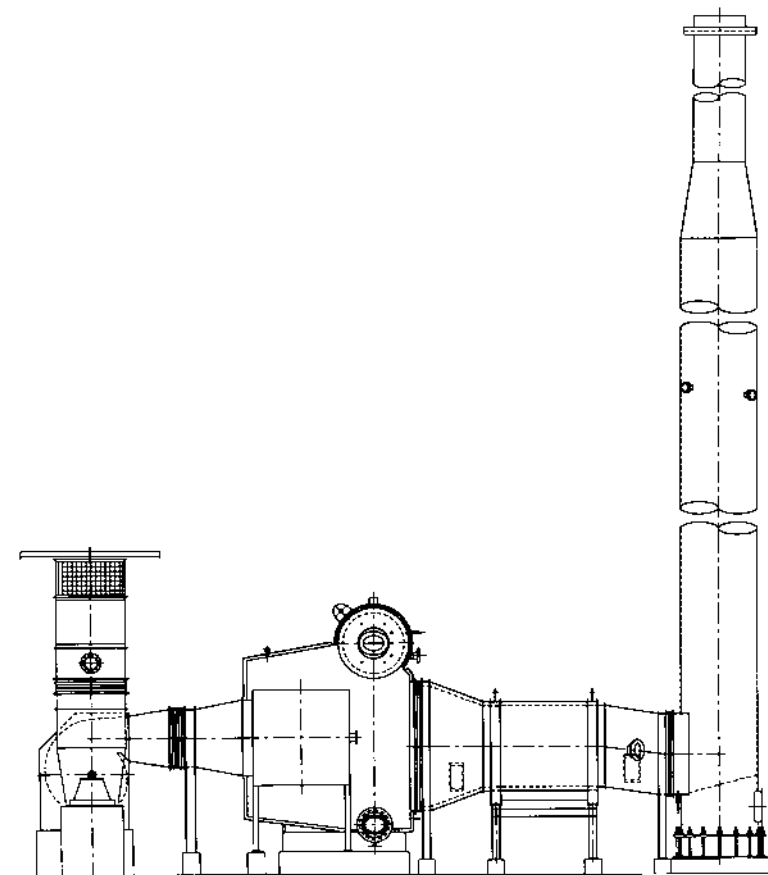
Package water tube boiler. (Courtesy of ABCO Industries, Abilene, TX.)
